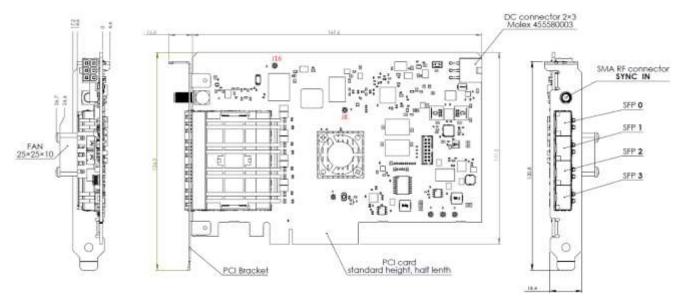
PCB top side and front panel views for type C board (dimensions in millimeters)
